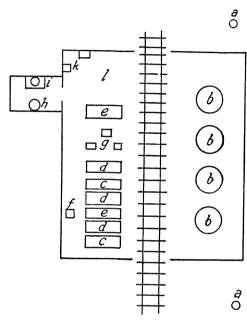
Plan of finishing mill of Penrhyn Slate Co. at Hydeville, Vt.: a, Derricks; b, rubbing beds; c, saws; d, planers; e, carborundum machines; f, band saw; g, drills; h, small rubbing bed; i, buffer; k, benches for trimming and corner filing; l, space for crating and storage.
